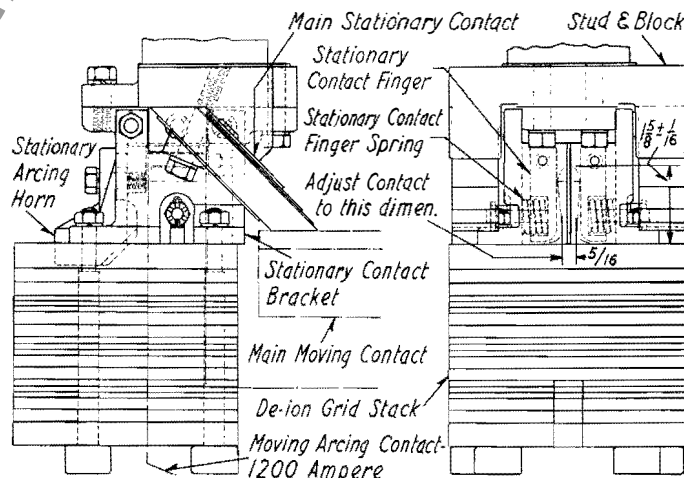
"DE-ION GRID" CONTACT ASSEMBLY
